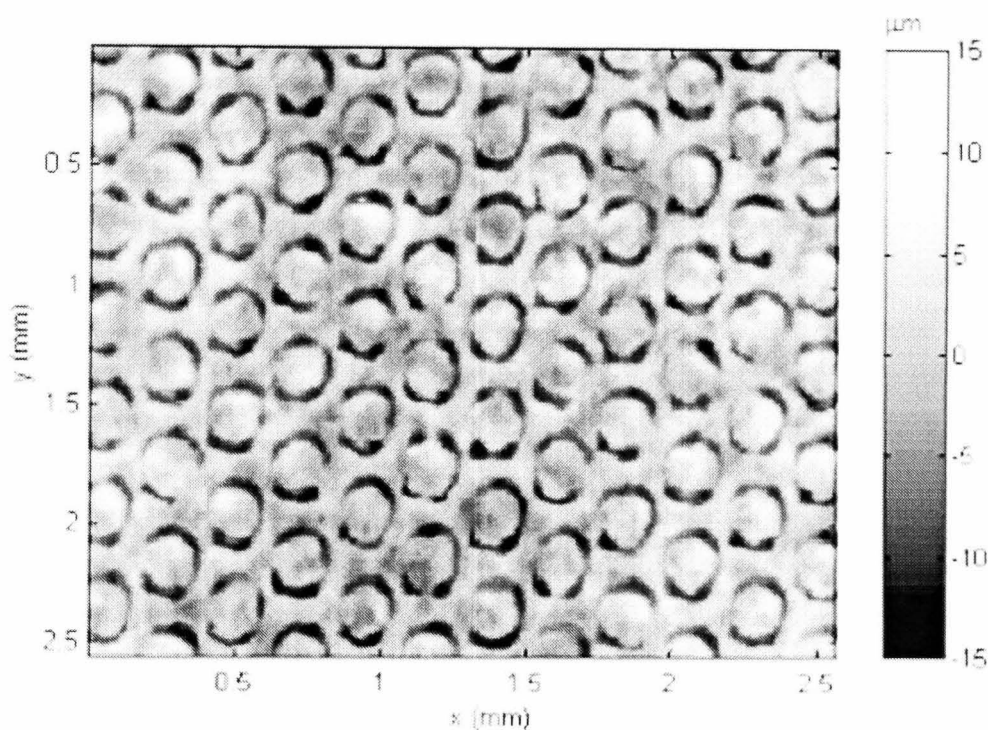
3D representation of an EBT texture of a steel sheet used in deep drawing
